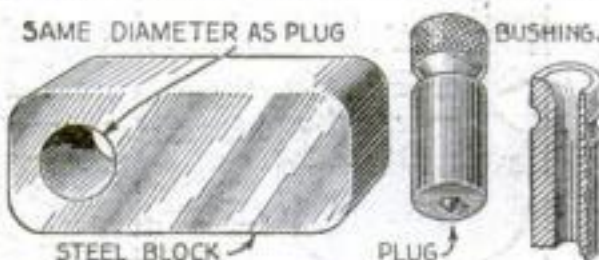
The drilling block, the plug used for locating it, and one of the drill bushings
